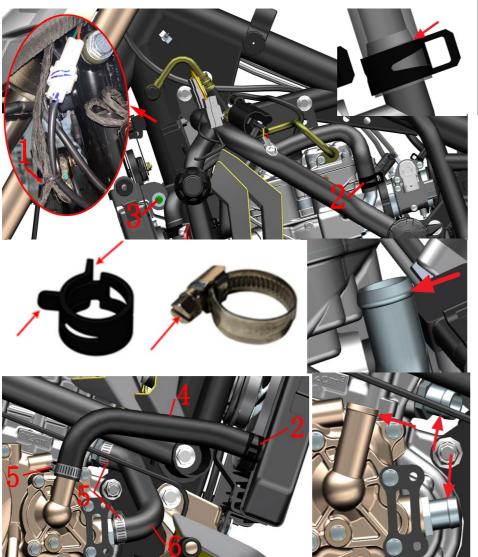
COOLING SYSTEM COMPONENT		Main water tank assembly 1	CHK	(0)
